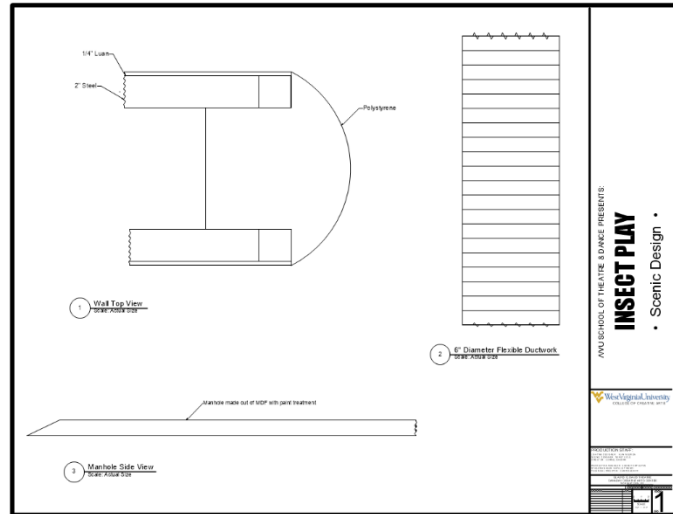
Section of Wall Unit, Ductwork, and Manhole
